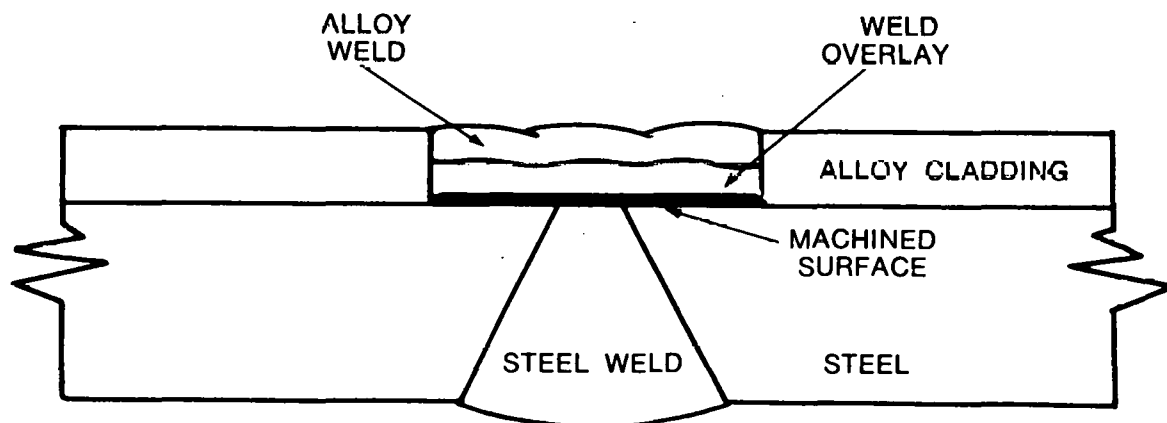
Design Joint in Steel Clad with a Copper Alloy. Reproduced from the *Welding Handbook*, 6th ed., Sect. 4, by permission of the American Welding Society.
